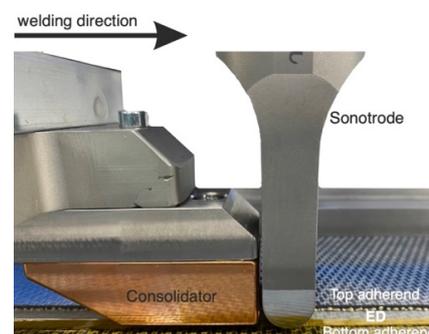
Rounded sonotrode and corresponding consolidator placement on a welded flat specimen.
